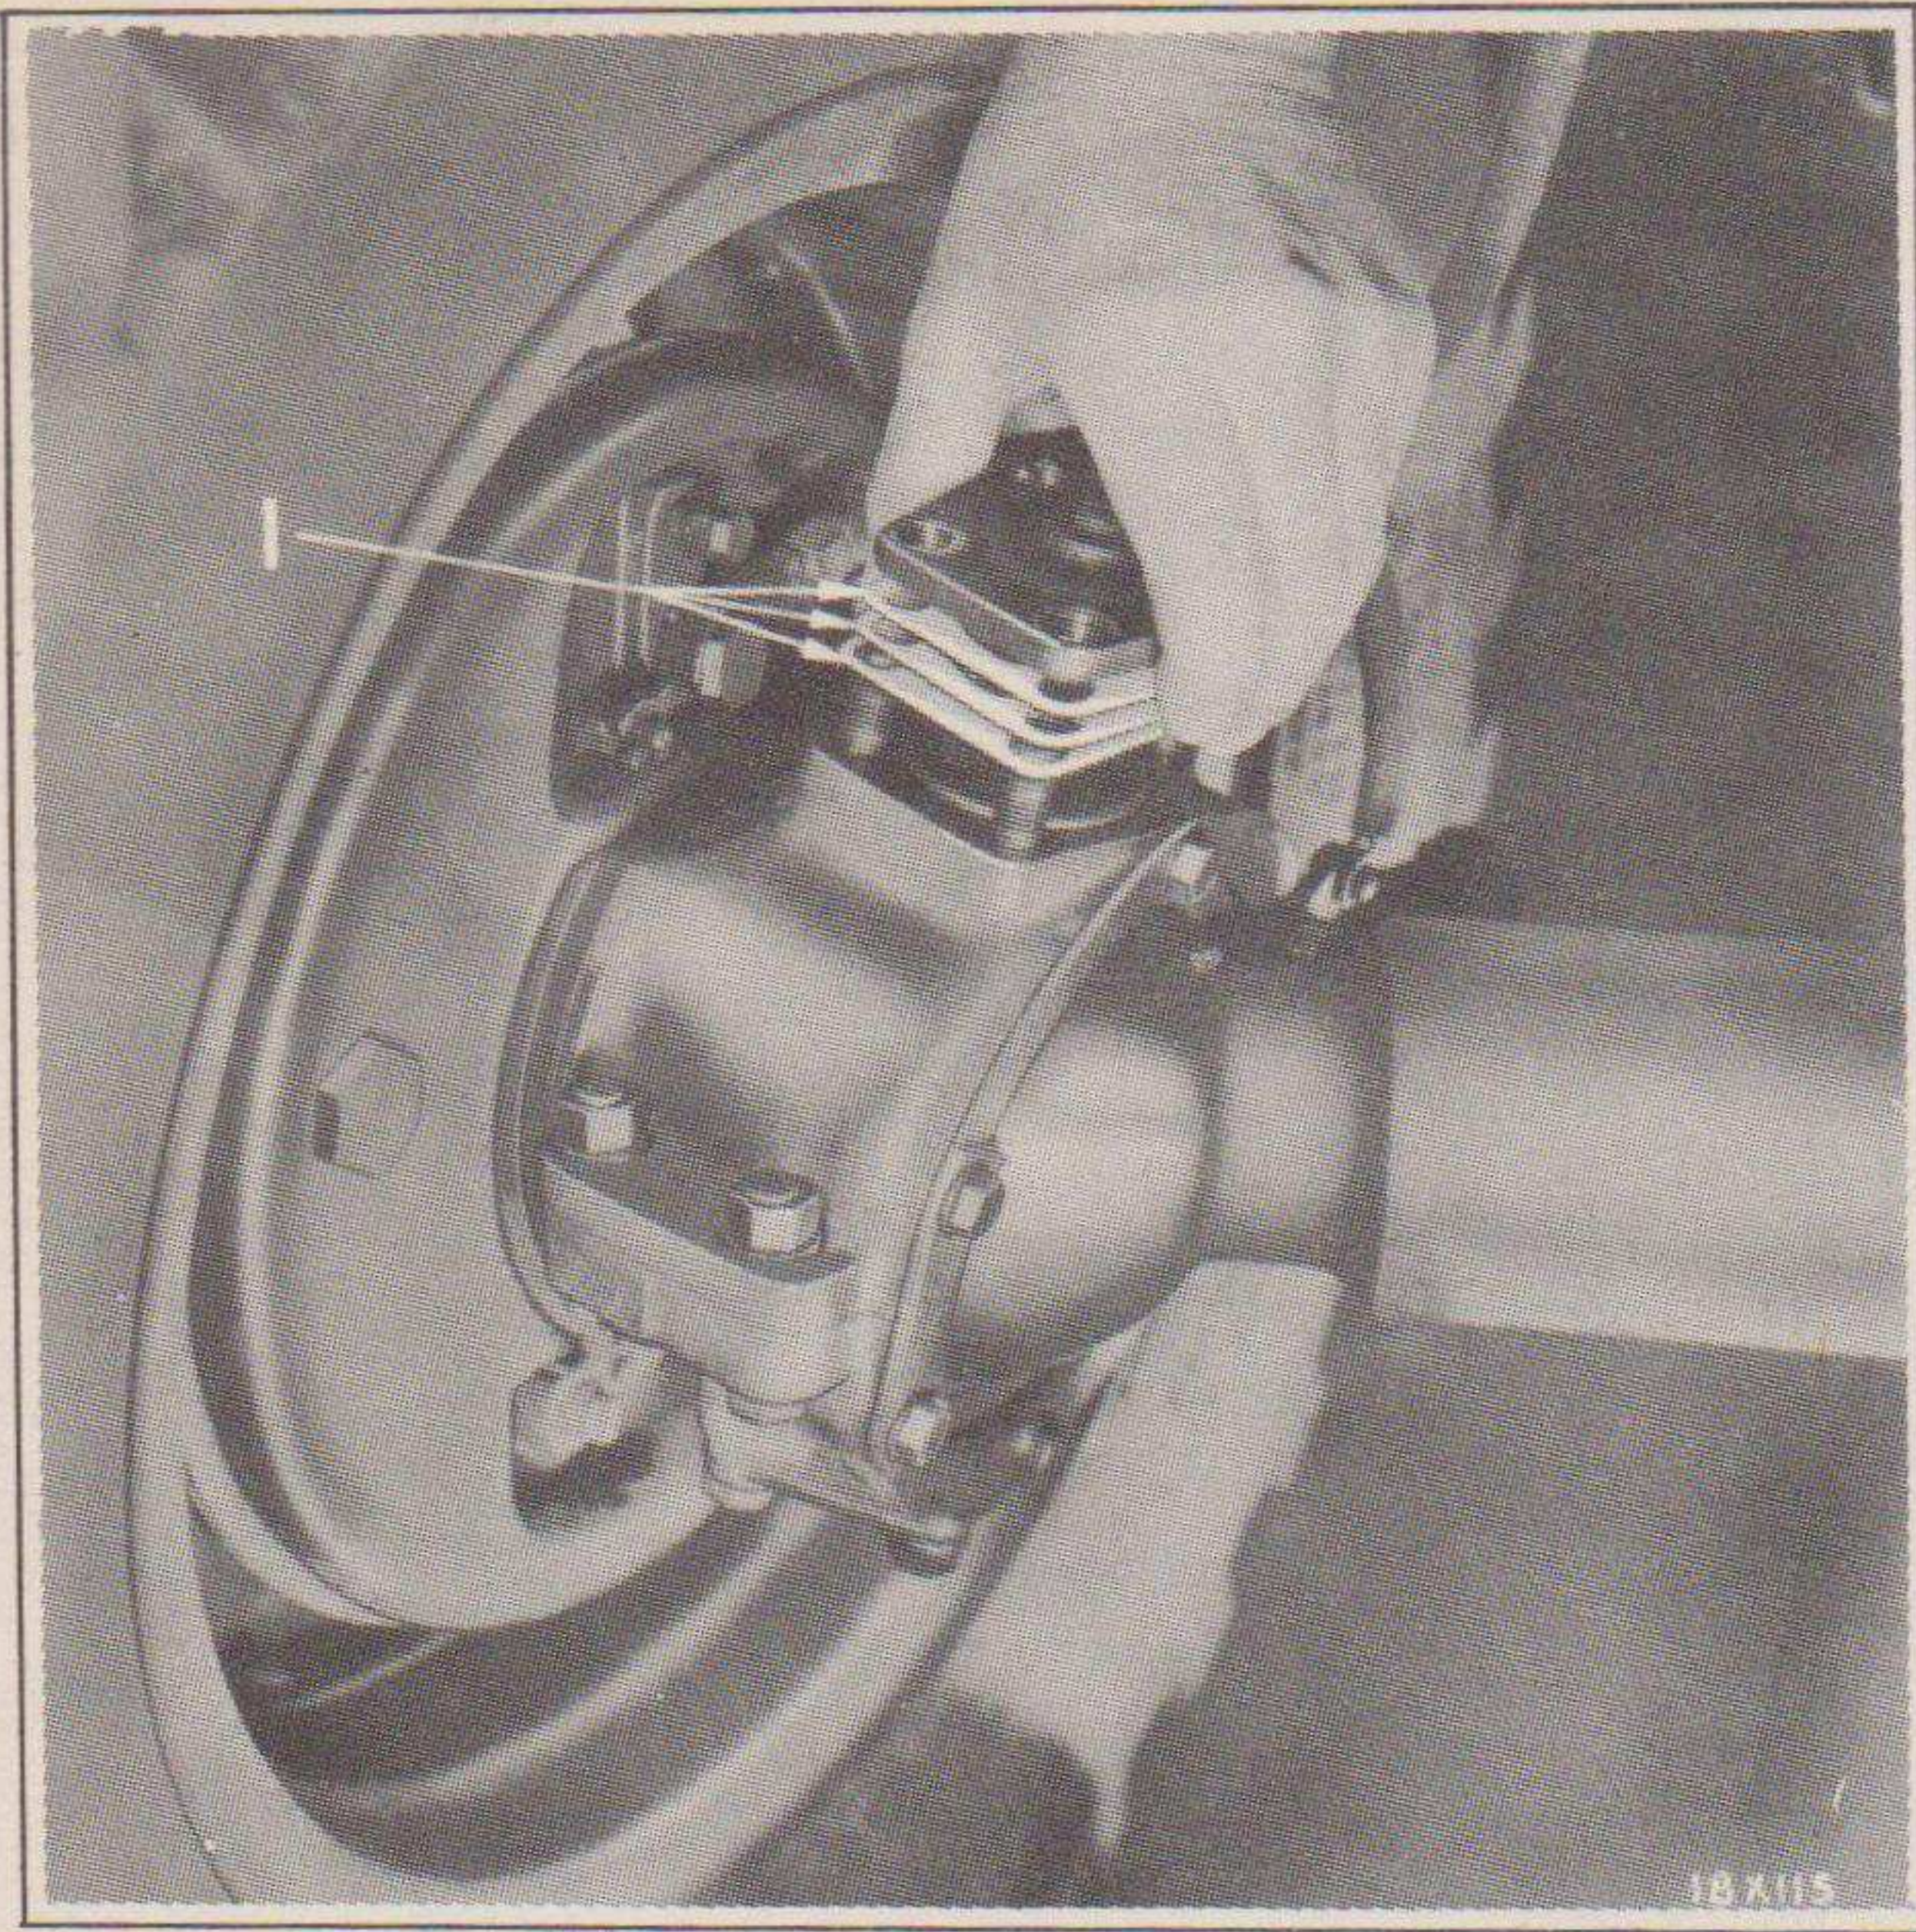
Steering Knuckle Flange Bearing Adjusting Shims
